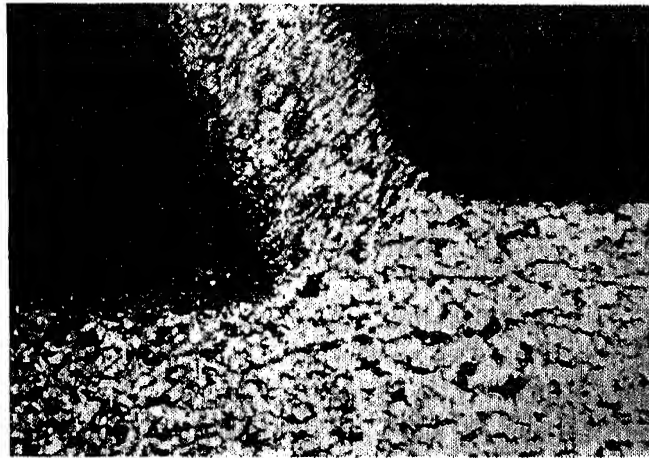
A photomicrograph of a continuous chip. (Courtesy The Cincinnati Milling Machine Co.)
